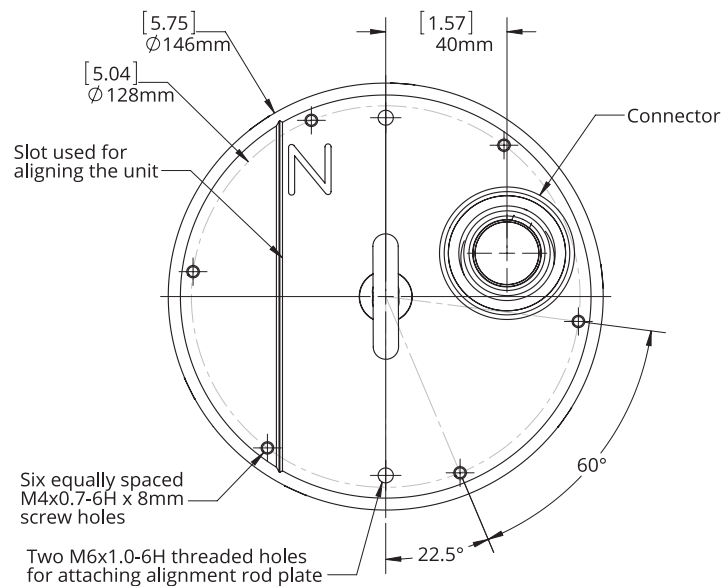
Bottom view of the Trillium Borehole Holelock
